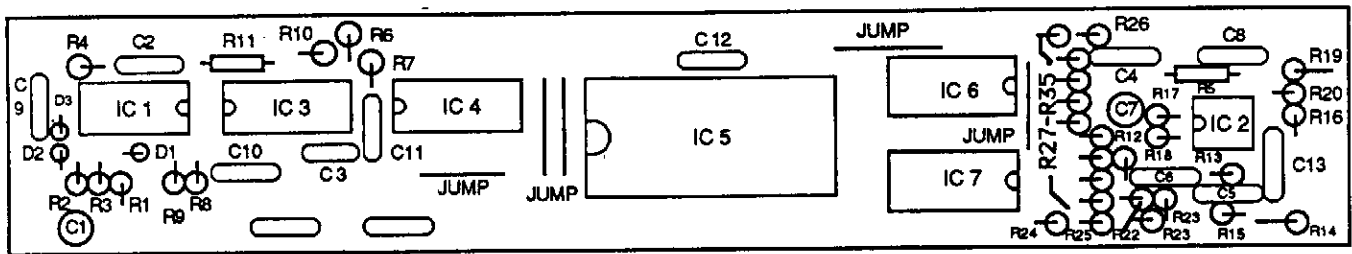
(above): foil side of Alpha Digital Drum PC board. Fig. 3 (below): parts placement.
